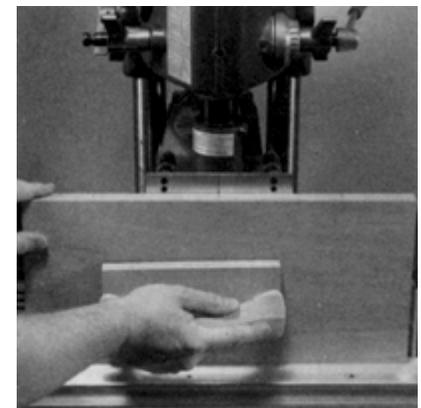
This setup is ideal for surface cuts along the edge of the workpiece.
